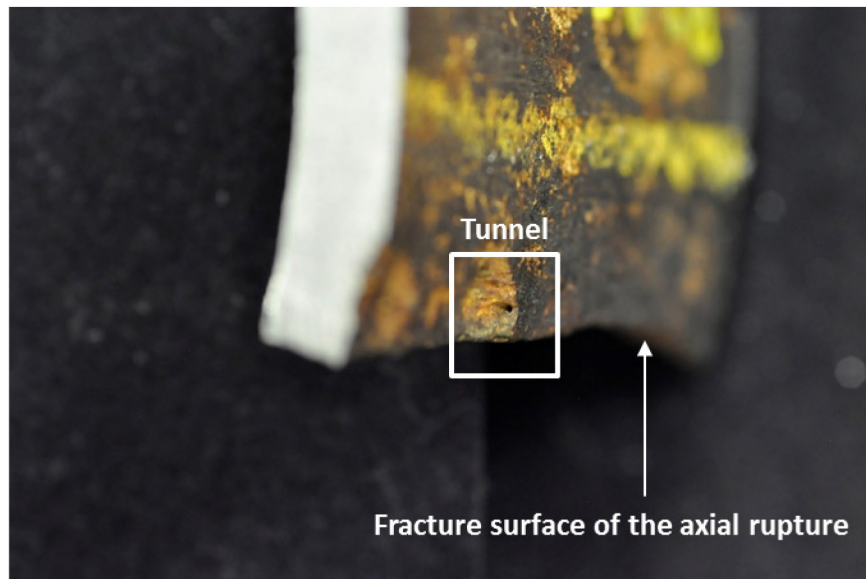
C023A1B2A5 Groove Tunnel Adjacent to Axial Rupture Fracture Surface
